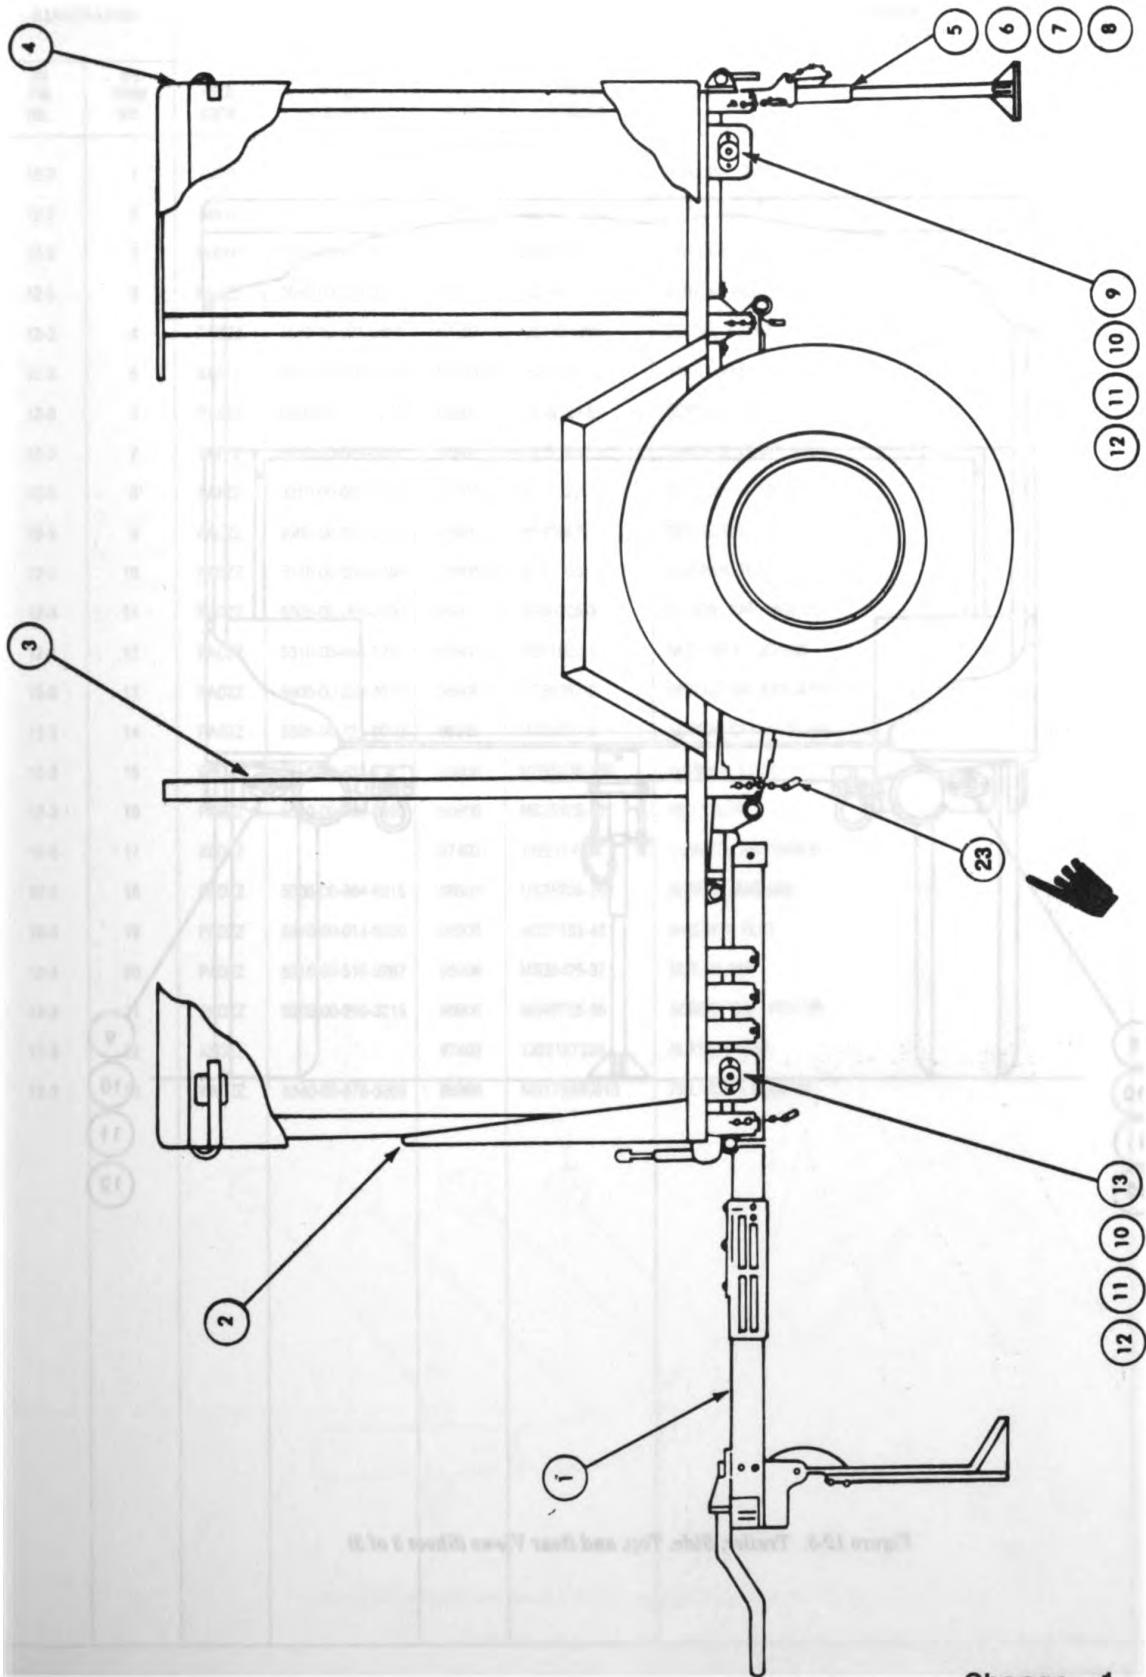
Trailer, Side, Top, and Rear Views (Sheet 2 of 3)
